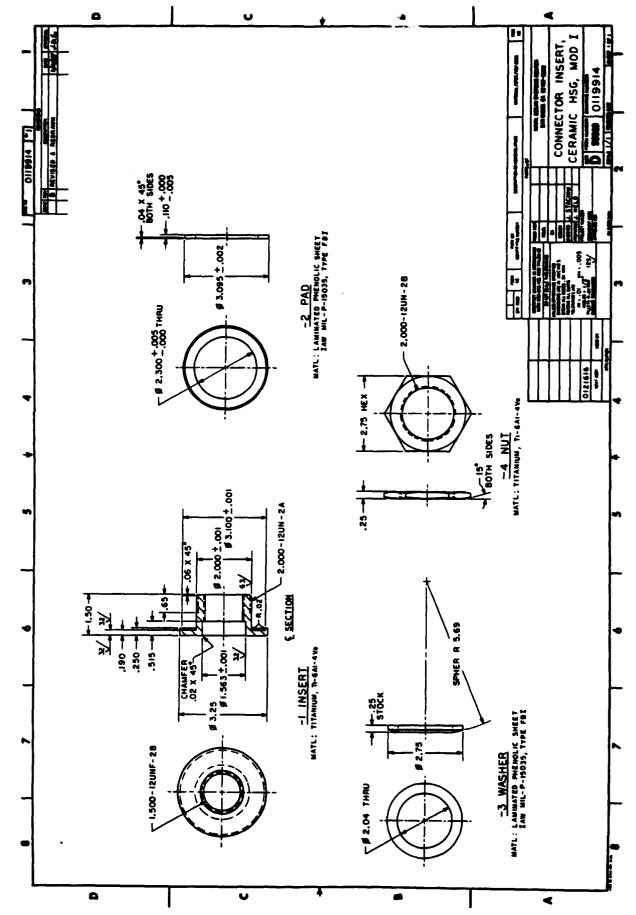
Improved connector insert (Revision A) for Mod 1 ceramic hemisphere after incorporation of phenotic bearing pad.
